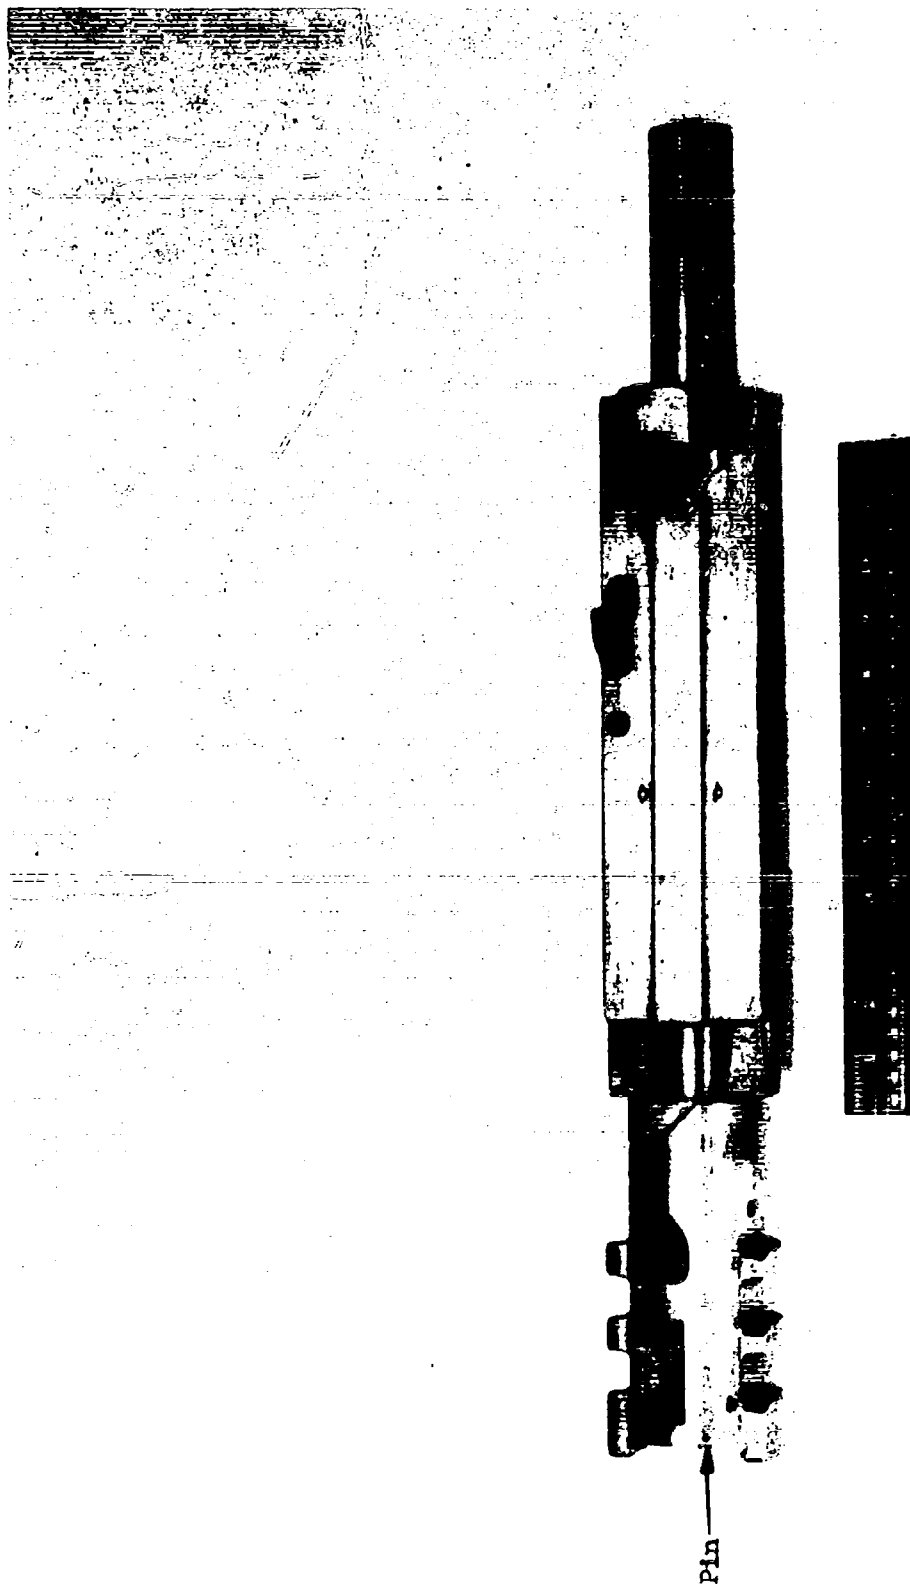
BOLT FOR 37MM NS GUN, UNLOCKED POSITION
